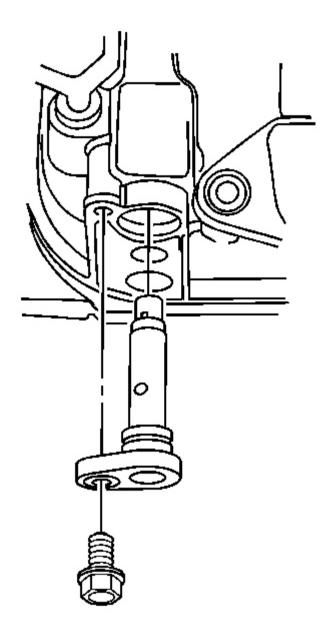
View Of Positive Crankcase Ventilation (PCV) Valve Courtesy of GENERAL MOTORS CORP.
